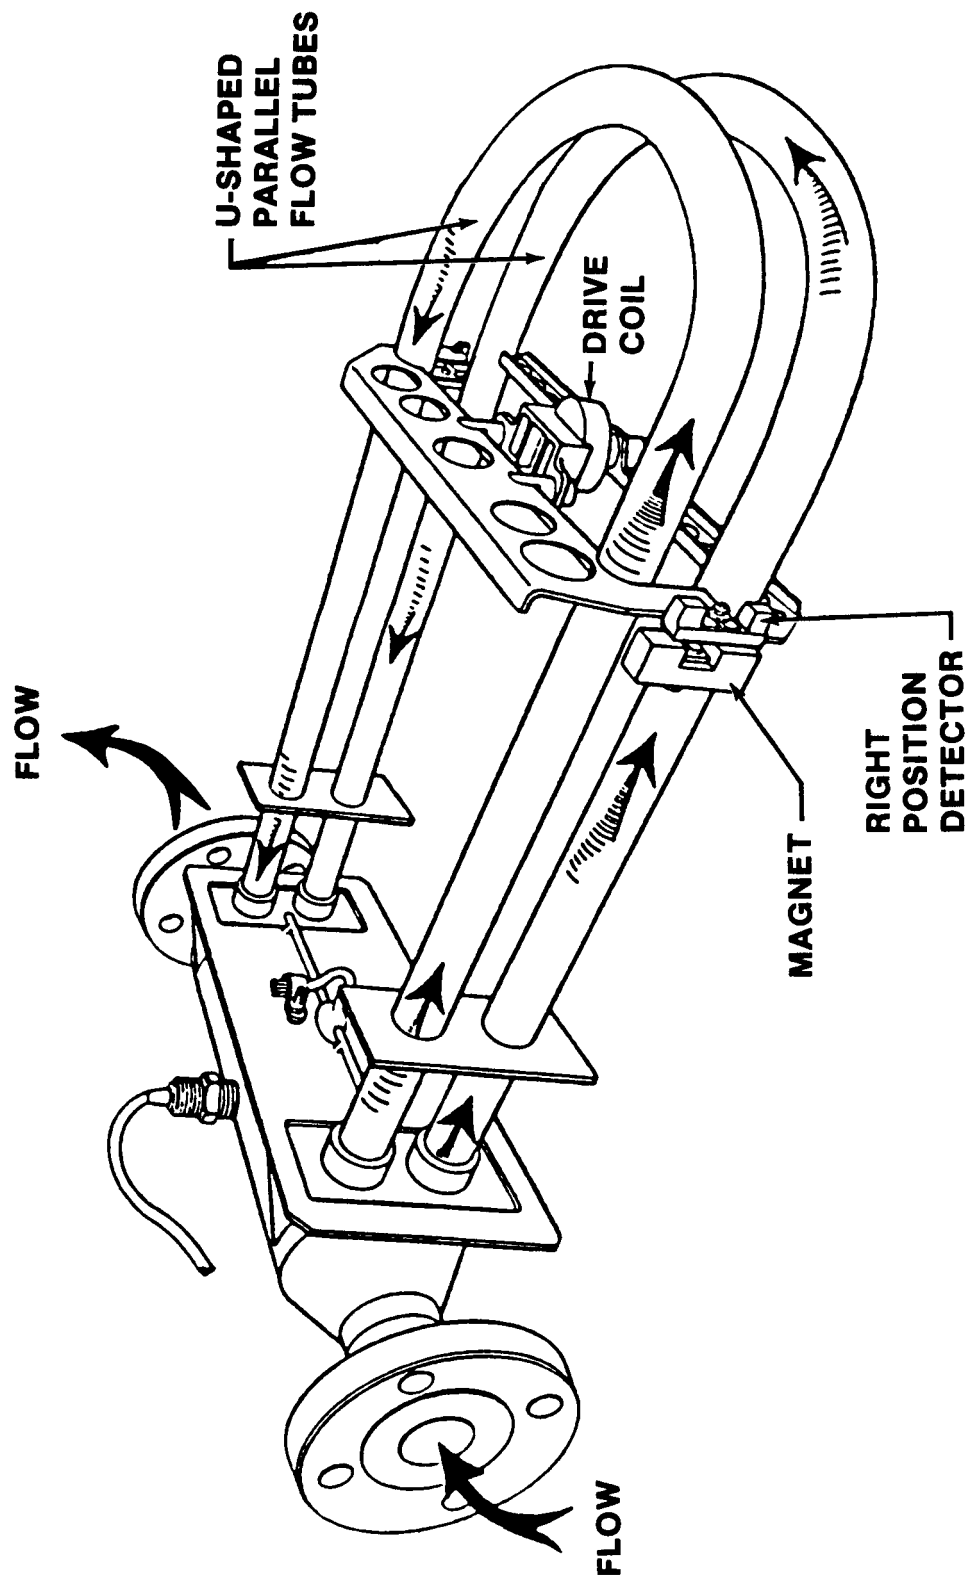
Coriolis mass flowmeter flow tube assembly.
